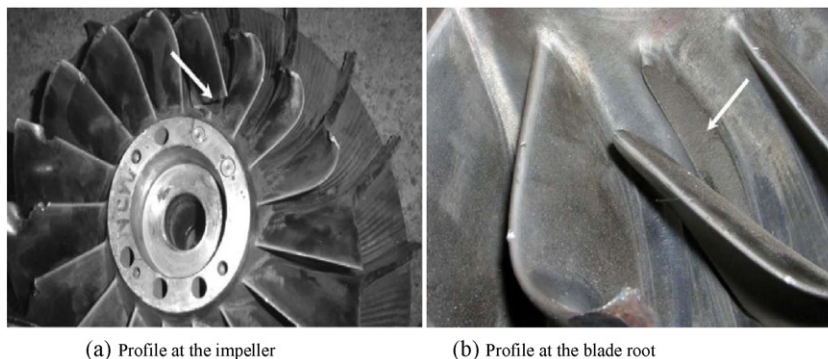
Fatigue cracking of centrifugal compressor impeller at the blade root [32].
